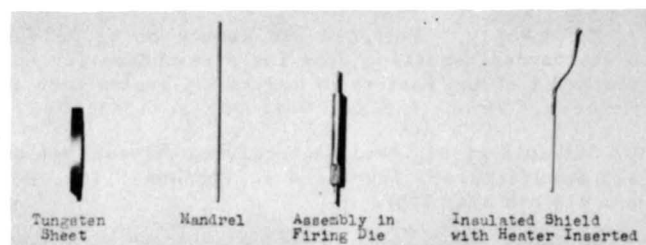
(a) - Fabrication of wrapped tungsten shield!
